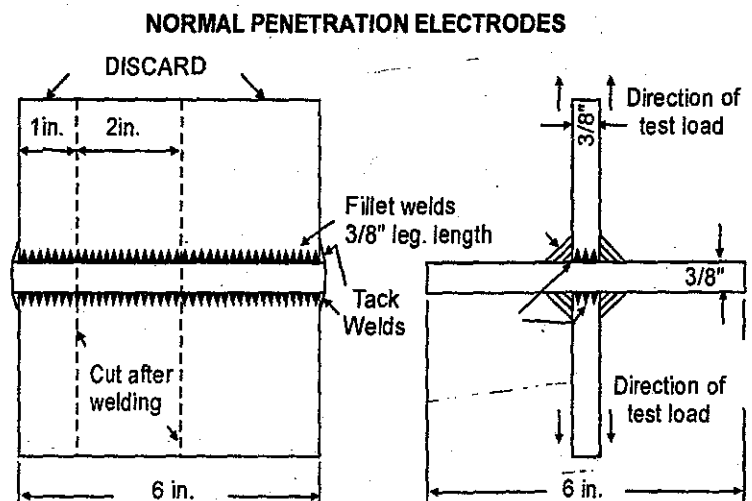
DIMENSIONS OF TRANSVERSE TENSILE TEST SPECIMEN
